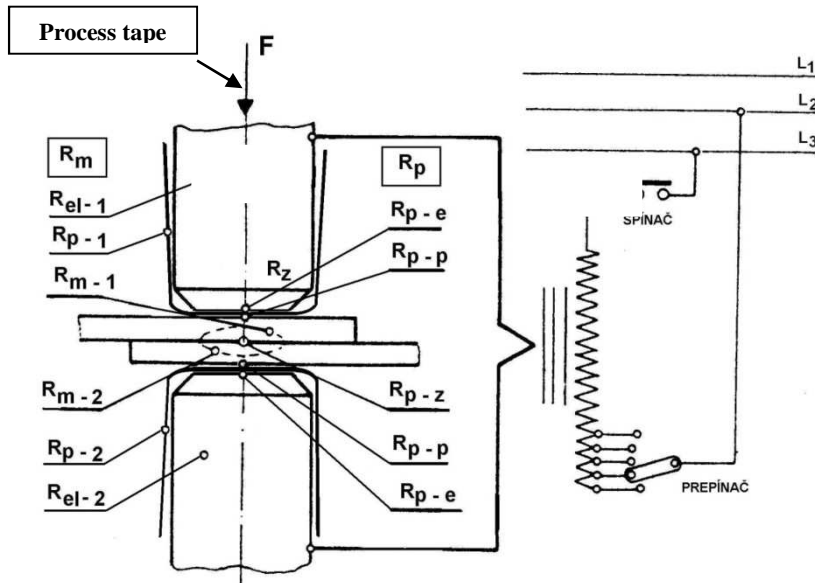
Scheme of DeltaSpot welding using process tape
